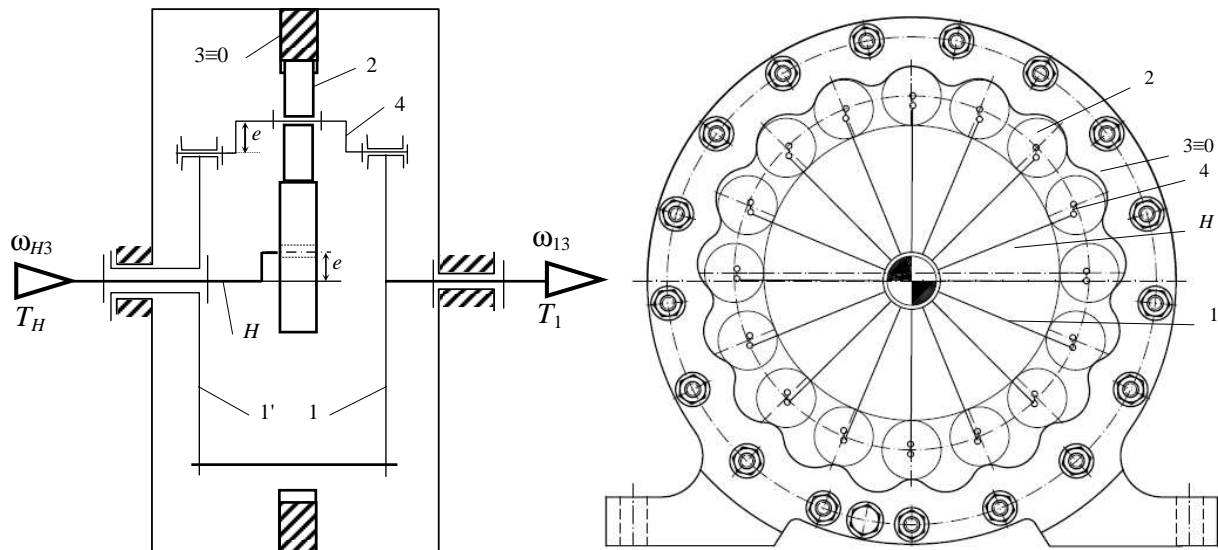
The cycloidal reducer equipped with a sun gear (3) and eccentric rollers (2)
